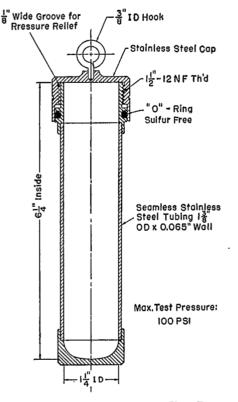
COPPER STRIP CORROSION TEST BOMB
